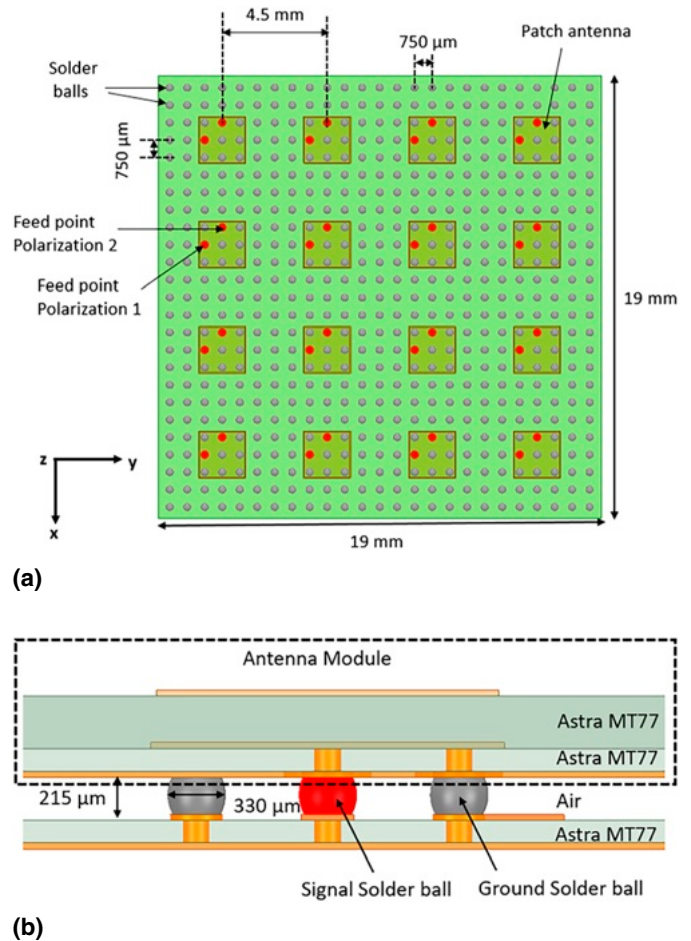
The proposed  $4 \times 4$  dual-polarized antenna array module with solder ball interconnects: (a) top view and (b) side view.
